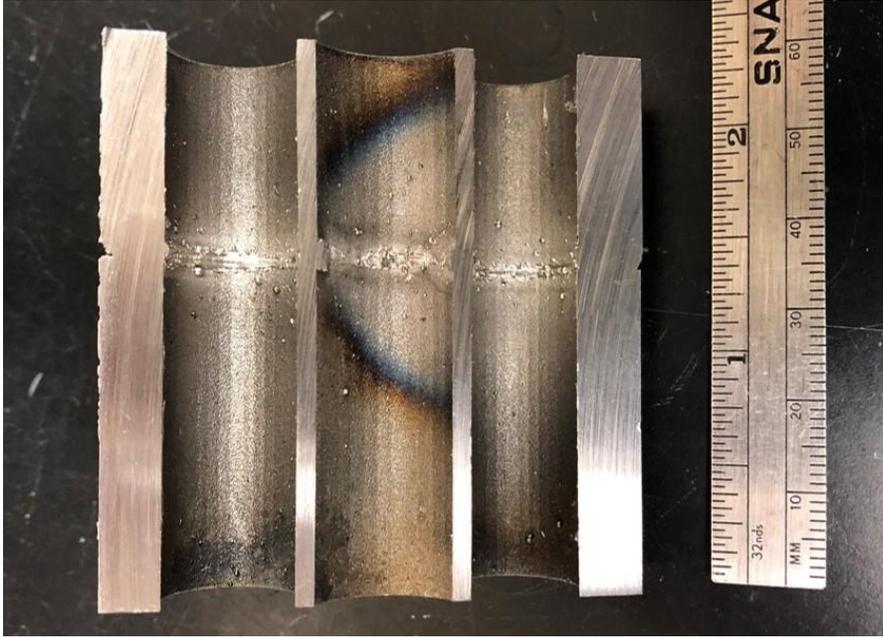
Butt weld of two AM fabricated Block 7 coupons using a 17 mA weld set-up. Note the excellent penetration and lack of spatter. No pins were used to maintain alignment for this test weld and some misalignment is visible.
